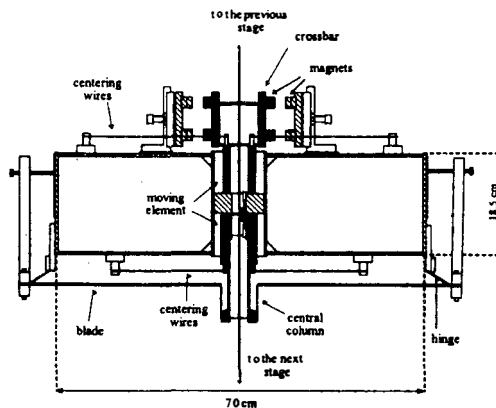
Drawing of a mechanical seismic filter. All the components are indicated
